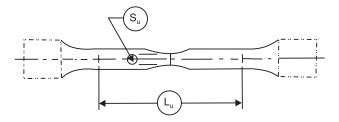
Test Pieces of Circular Cross-section after Fracture
